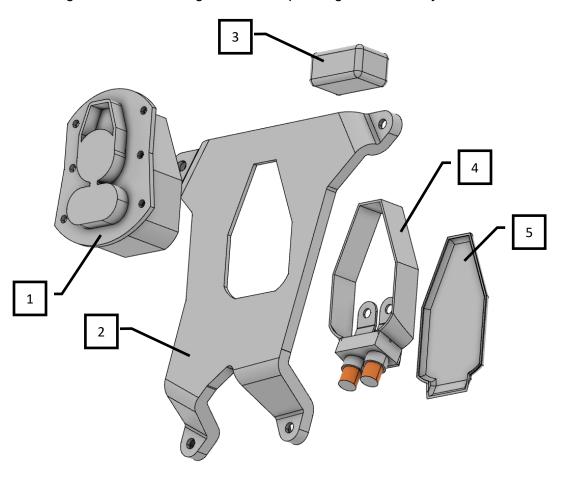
Exploded View and Callouts, Canoo Charge Port Concept Design with auxiliary bracket
